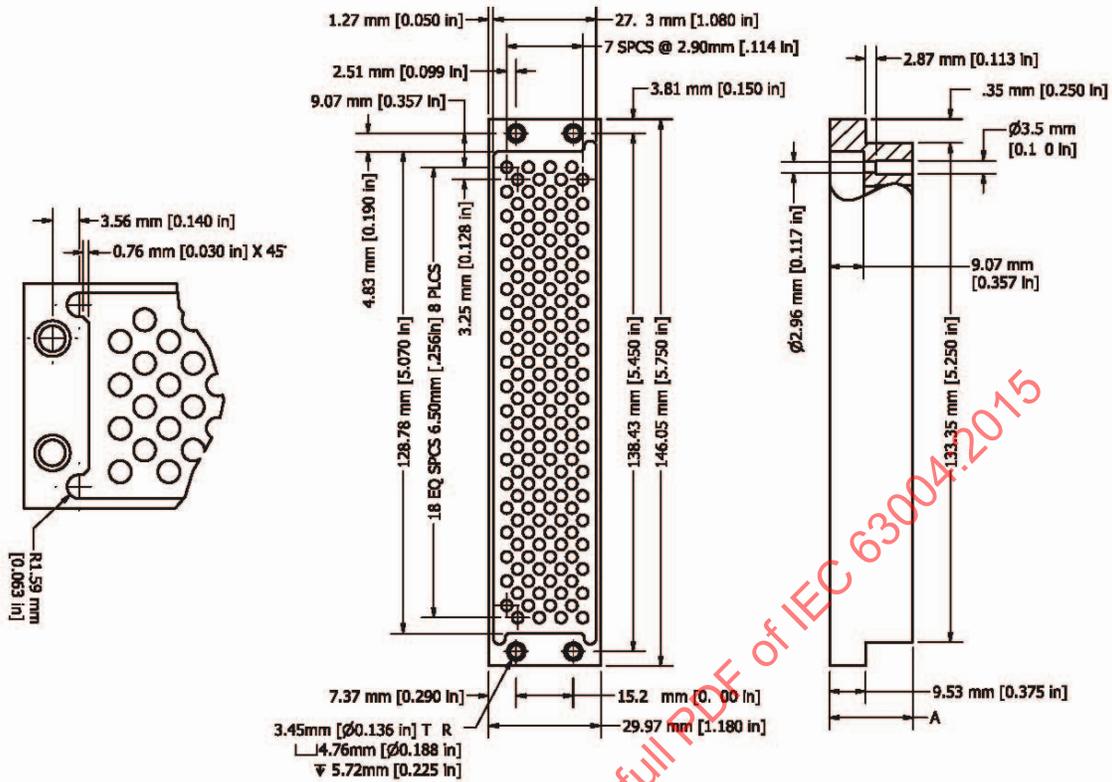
Coax module, 2 slot, 152 position for 5 GHz contact, fixture housing physical layout
